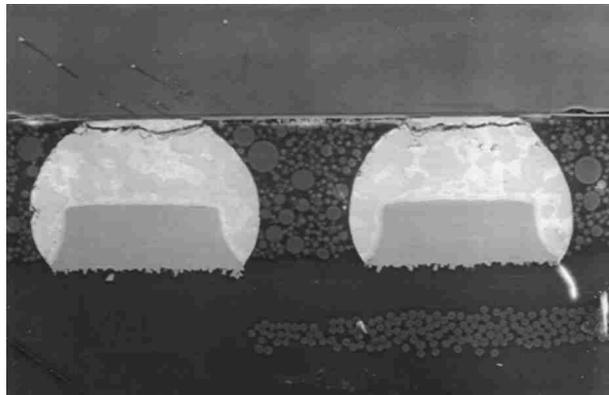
Solder Joint Failure in a Flip Chip Package Due to Large Shear Strains
